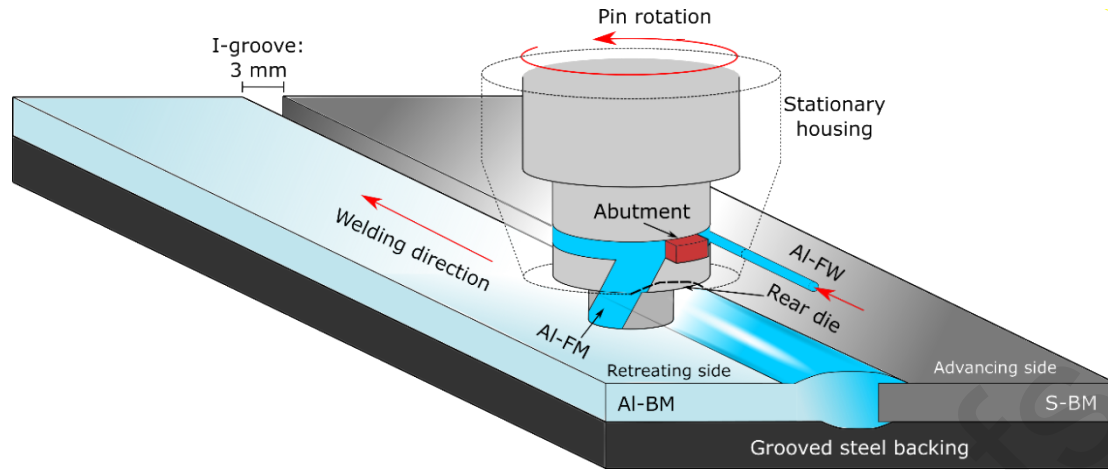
Schematic illustrations of the HYB PinPoint extruder and experimental set-up used in the manufacturing of the third generation Al-steel HYB butt weld.
